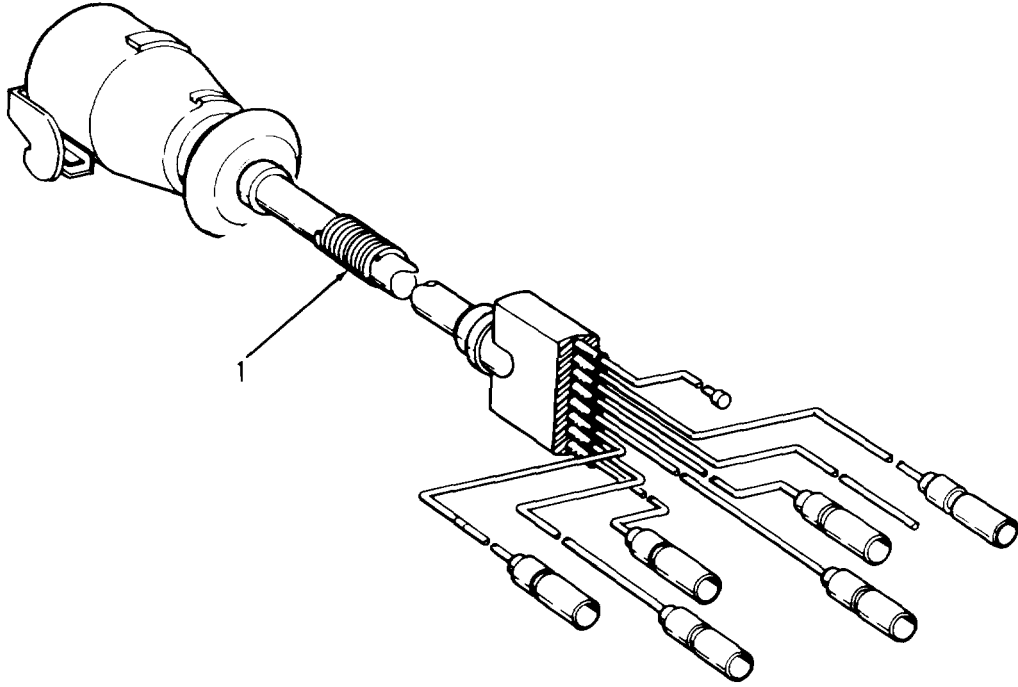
INTERVEHICULAR CABLE ASSEMBLY.
